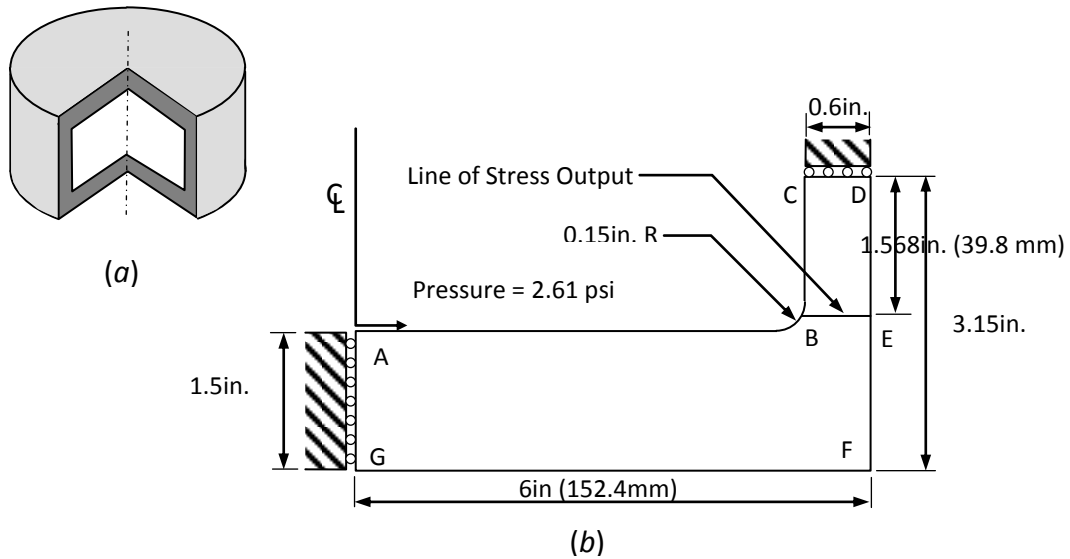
Axisymmetric pressure vessel geometry. (a) Schematic drawing. (b) Dimensions
